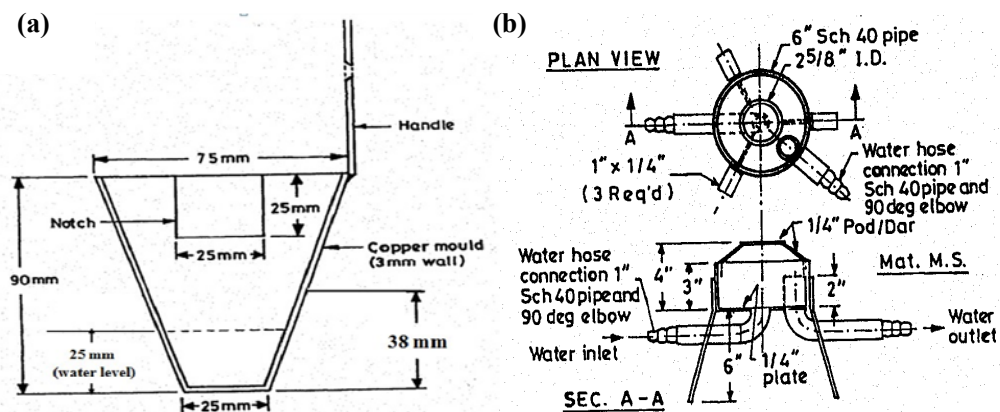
Schematic illustration of the TP-1 moulds (a) ladle (b) plan and side view
